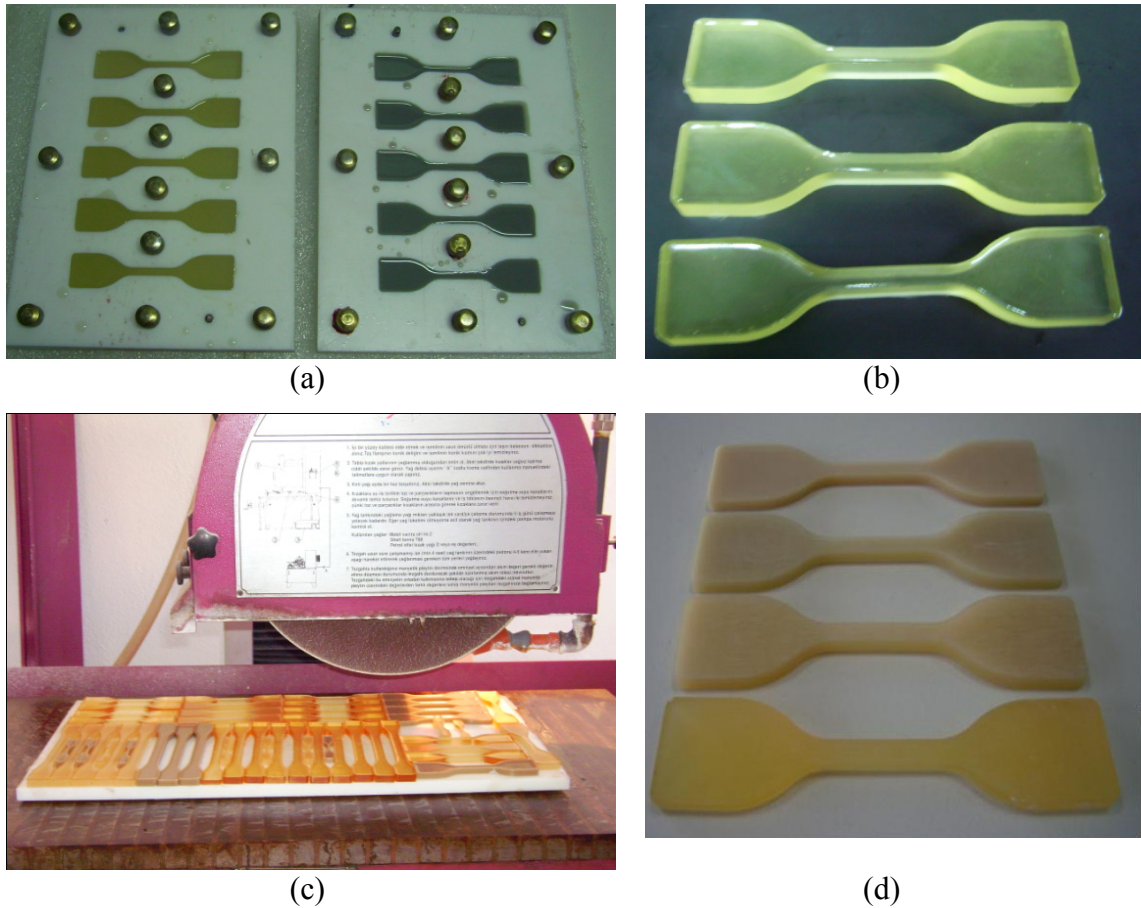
Tension test specimens: (a) molded, (b) after molding and (c) and (d) after grinding process.
